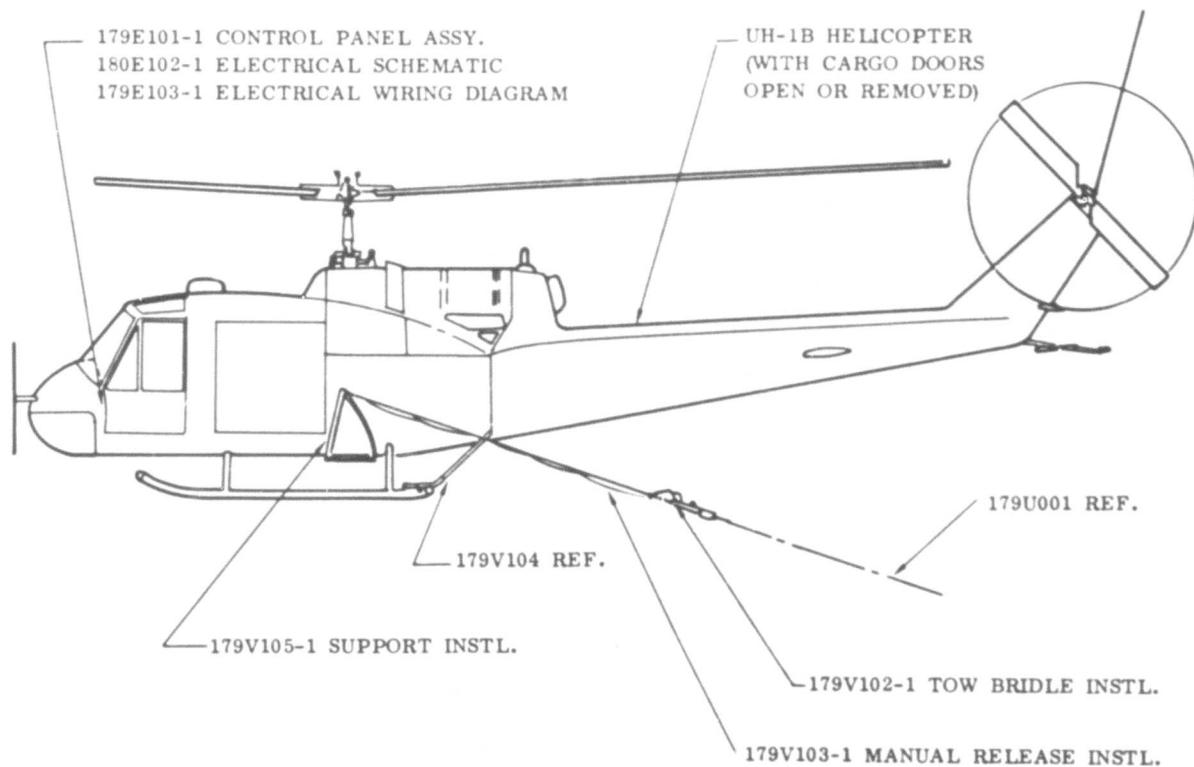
UH-1B Helicopter, Modified to Tow LUG
